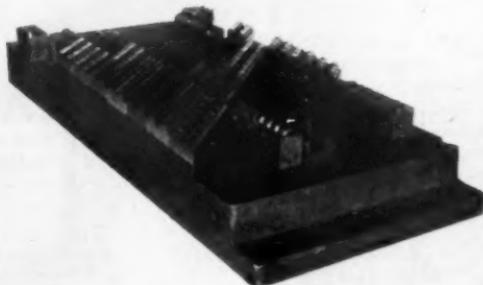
Close up of the shear-cut broach, and shaft immediately after shear-cutting. The various arrangements of cutting tools for the varying diameters of the shaft are plainly visible.
